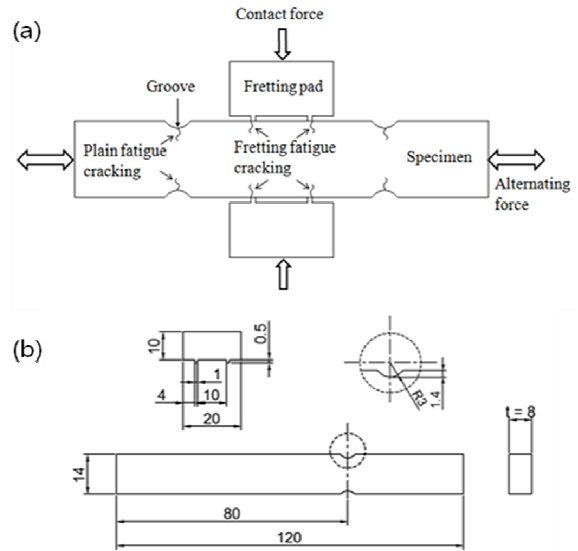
(a) Schematic of fretting fatigue test with grooved specimen, and (b) geometry of the specimen and pad with dimensions
